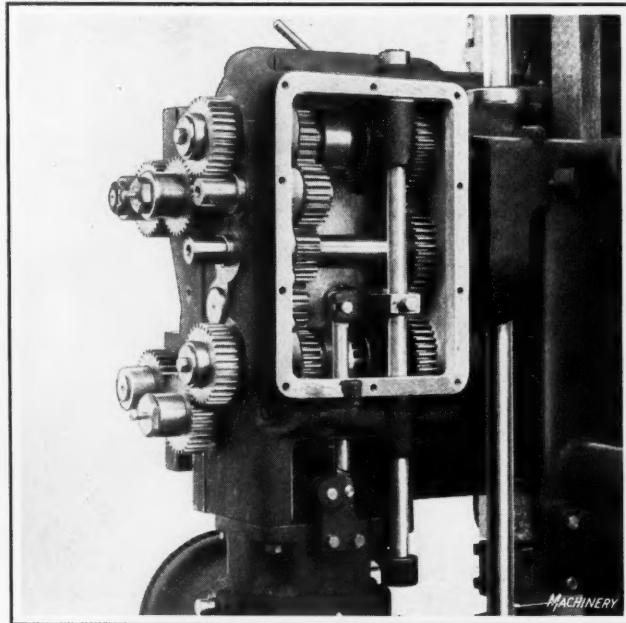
Feed-clutch Gear-box with Covers removed to show Change-gears and Studs for Threading Gears
